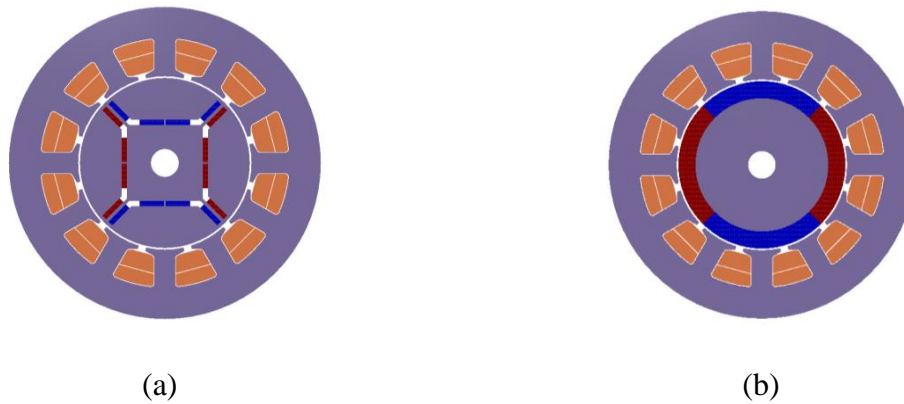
Section view of (a) Interior permanent magnet machine (b) Surface permanent magnet machine
